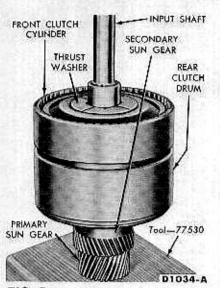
Input Shaft, Clutches, and Primary Sun Gear
